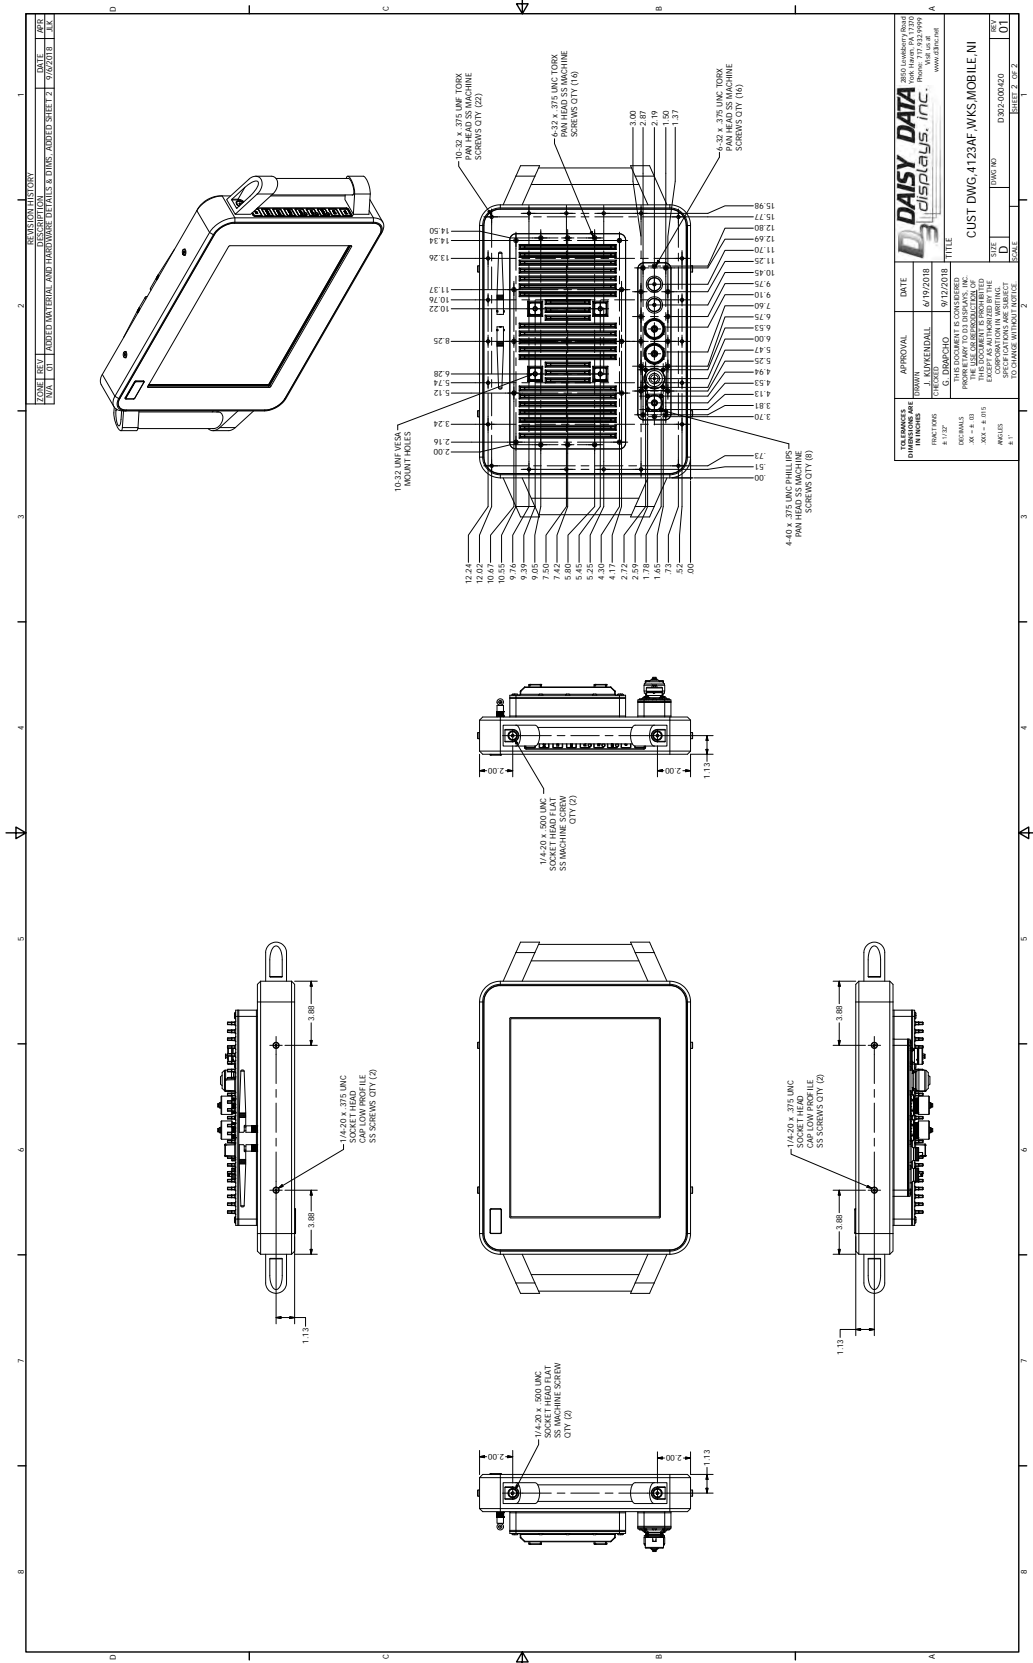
Model 4123AF Mechanical Drawing (2 of 2)
